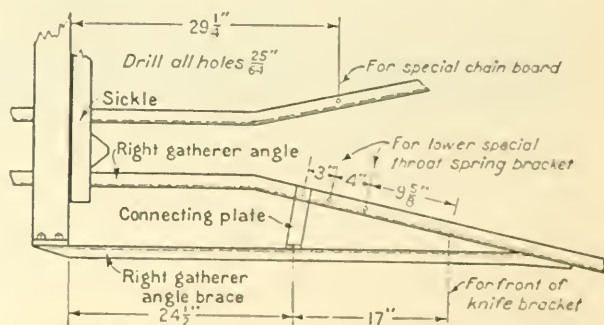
Special holes required in gatherer angles and brace, Case-Osborne corn binder
